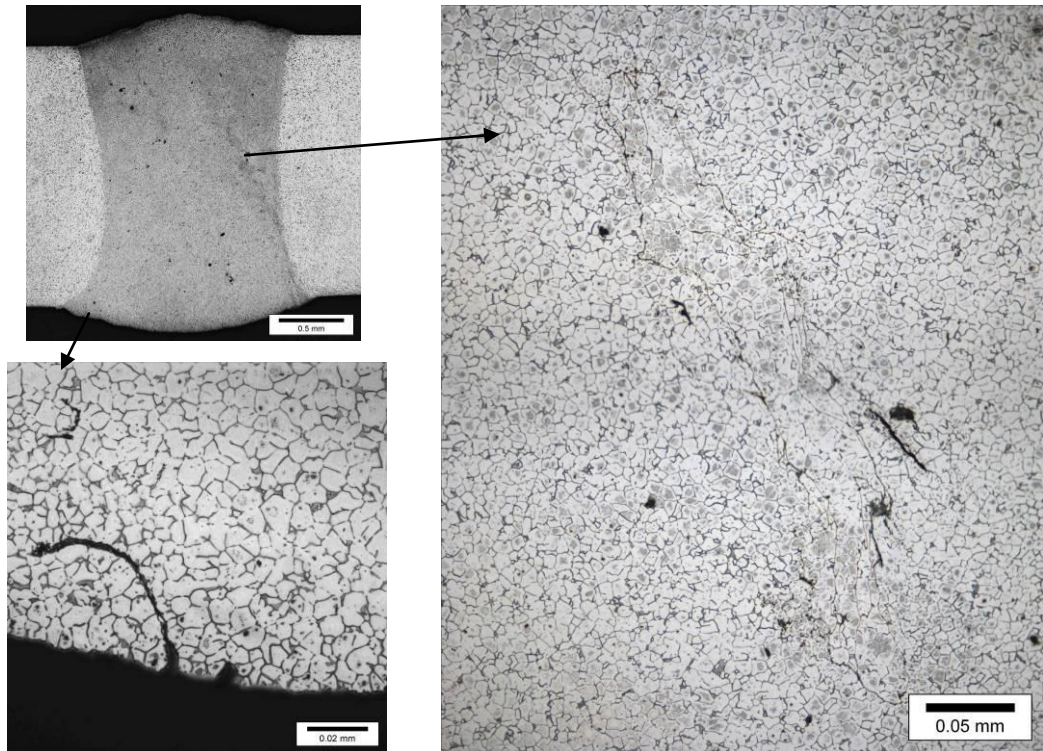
Solidification Cracks in the Sample Welded at 4 kW – Ending Section
